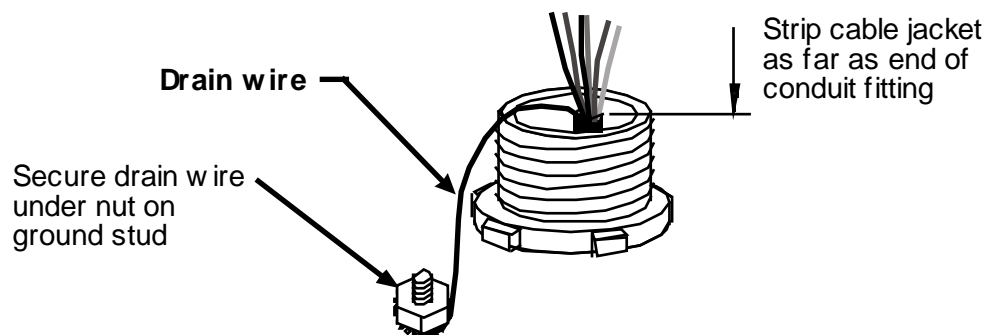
Connecting Shield Drain Wire to Ground Stud
